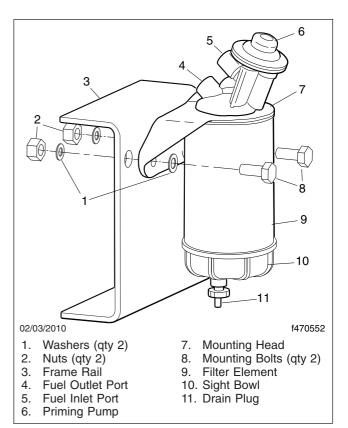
, Alliance Fuel/Water Separator Assembly and Installation
